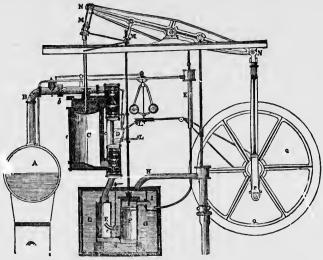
, -- ILLUSTRATION OF A STEAM ENGINE.
